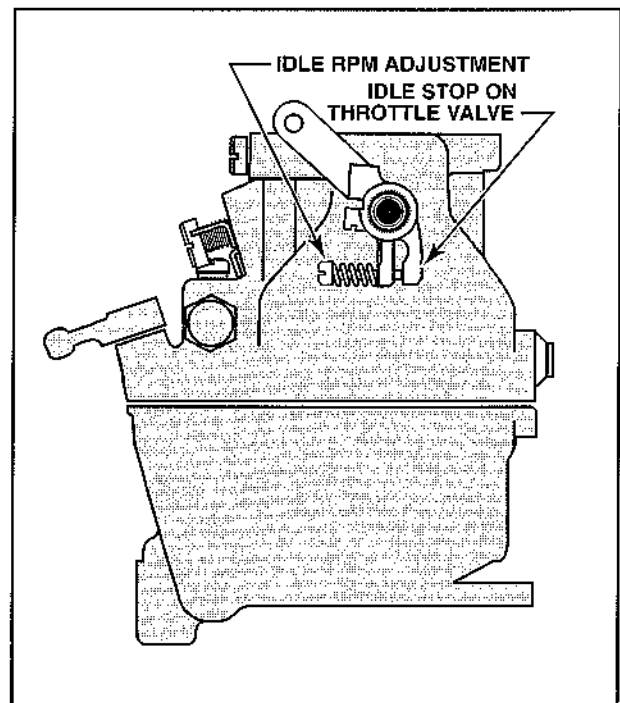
To adjust the idle speed on most carburetors, a spring-loaded screw is rotated to provide a contact for the idle stop on the throttle valve linkage.
